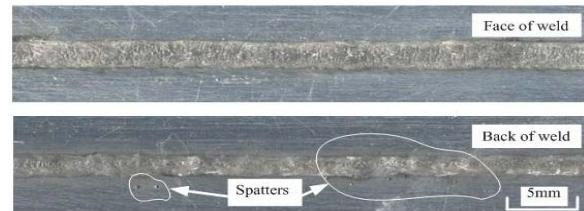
Macrograph of laser butt welding 2mm 5A06 aluminum alloy with filling wire (detailed welding procedures are shown in Table 3).
